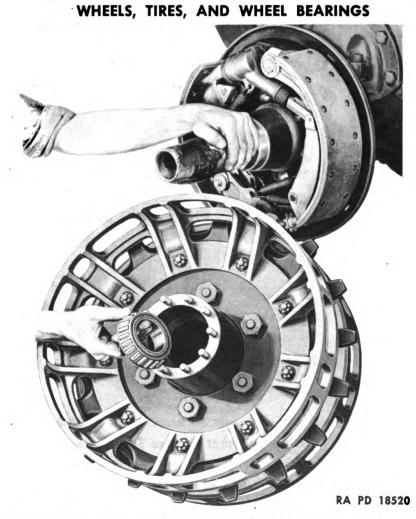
Drive Sprocket and Hub Assembly – Removed
